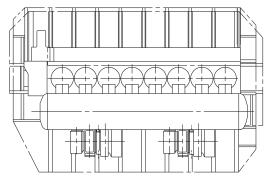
Engine outline, S60MC-C with turbocharger on exhaust side
